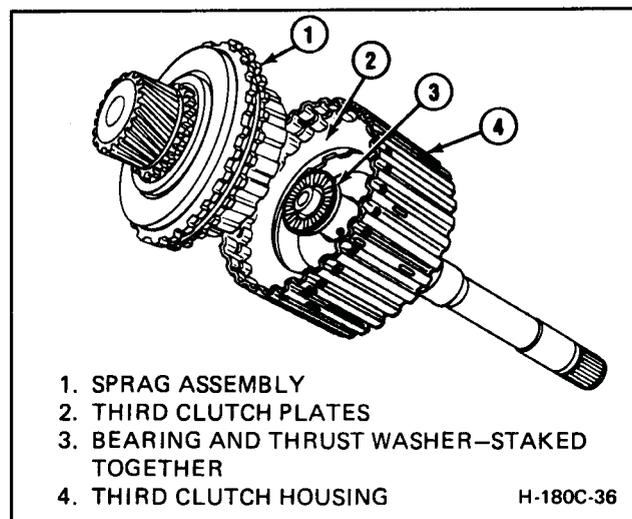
C-47 Installing Sprag Assembly Into Third Clutch Assembly
